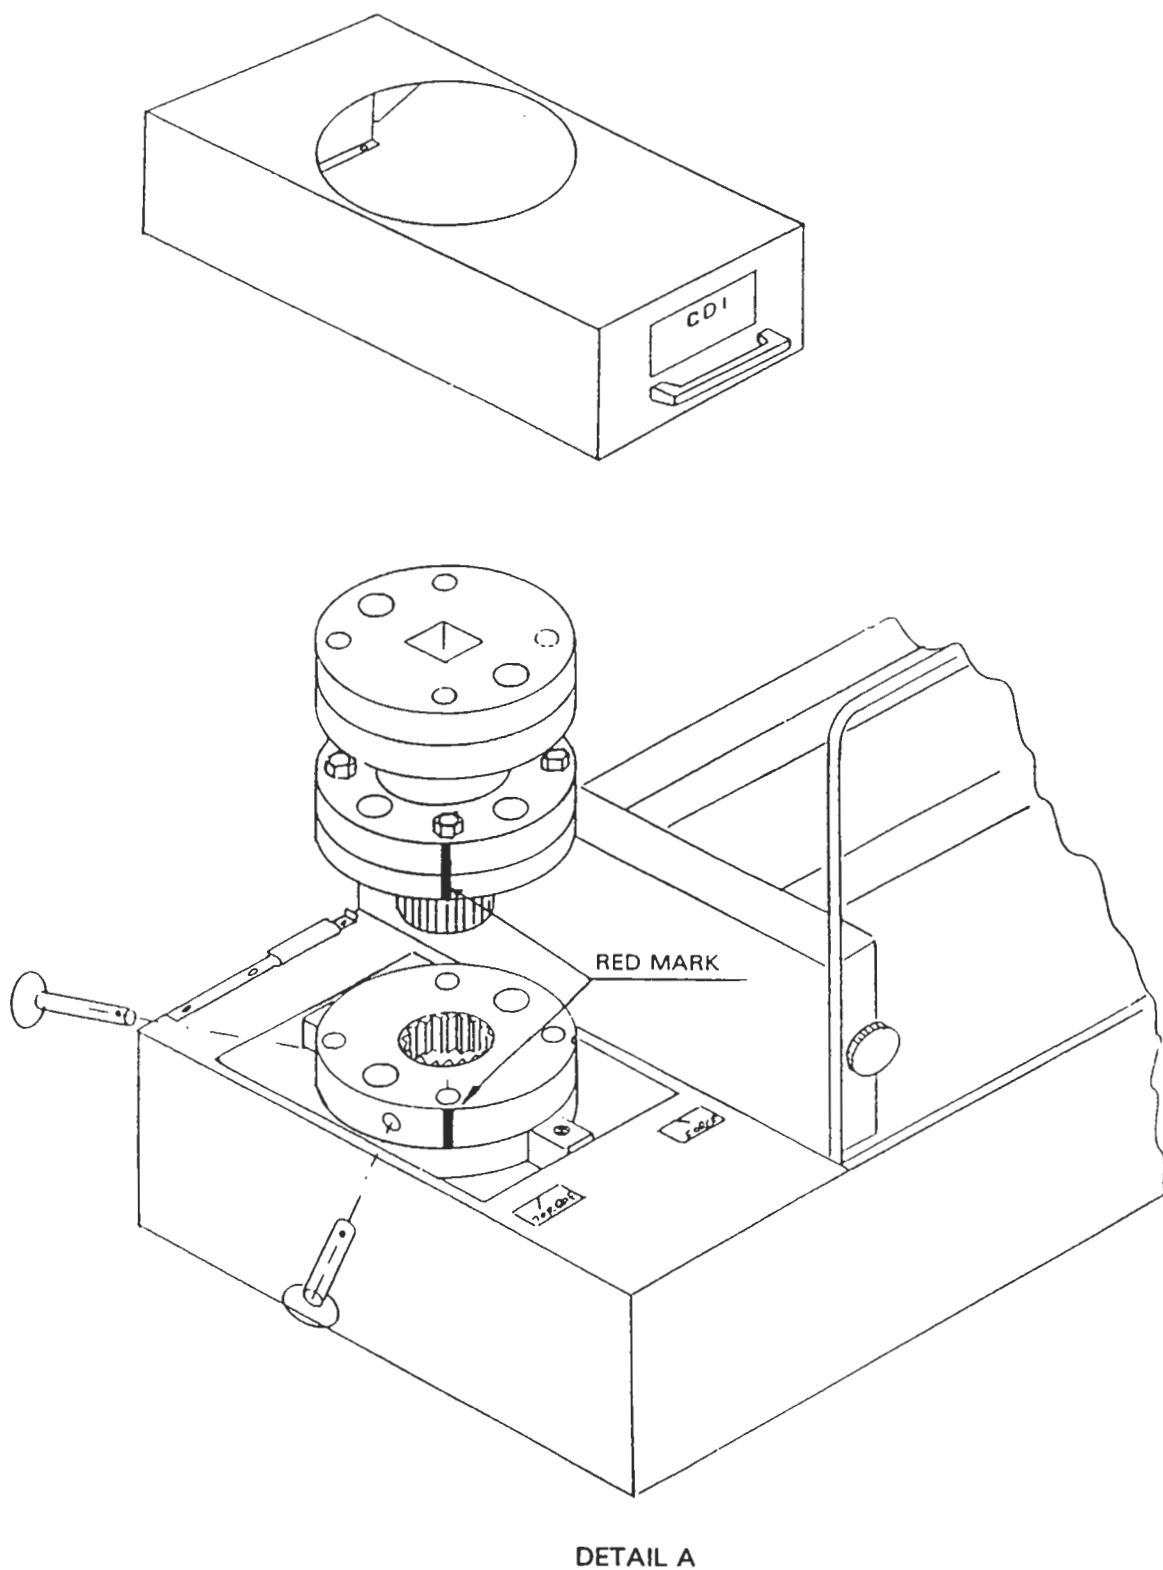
Torque Multiplier Test Setup (Sheet 2)
